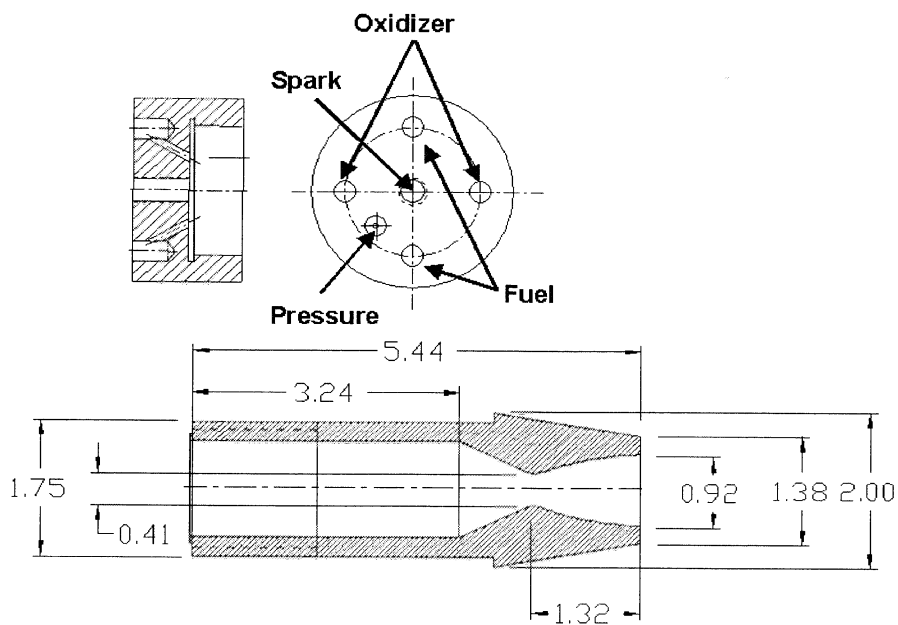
Rocket Thruster Assembly for APL-10C Engine
